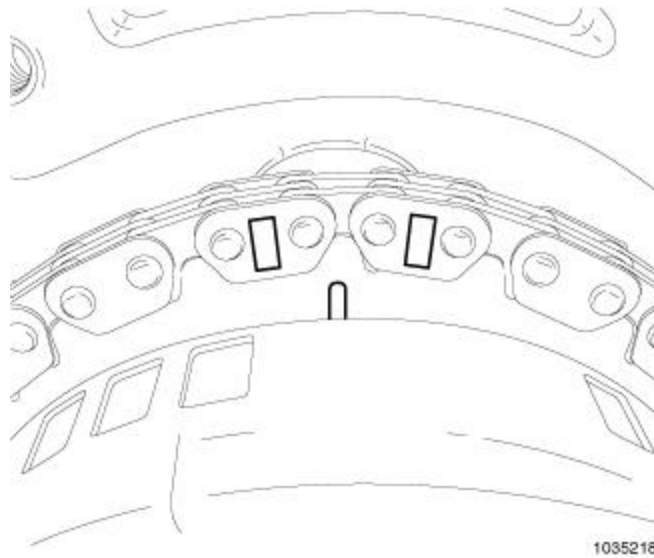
Aligning Timing Chain & Camshaft Phaser Marks
